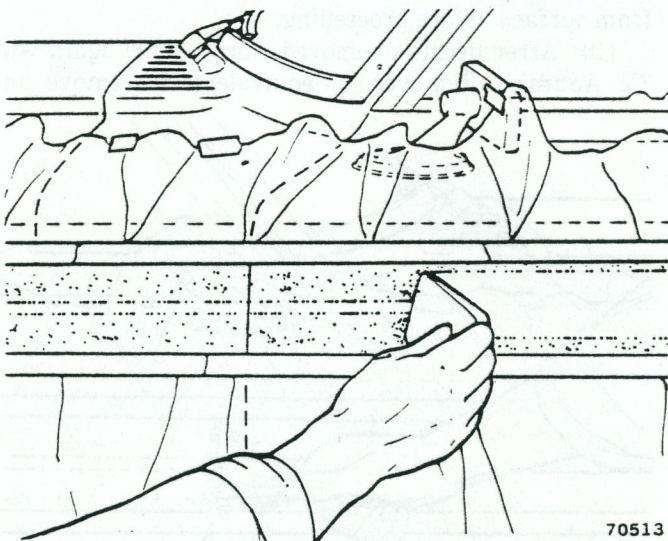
P-4 Using Squeegee to Remove Adhesive Residue
